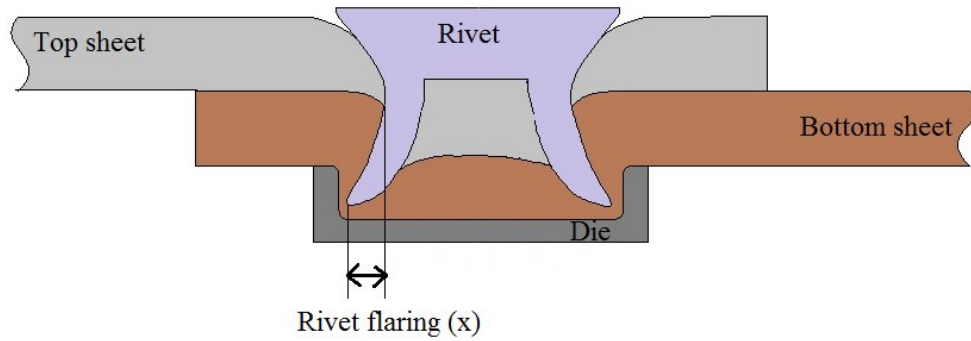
Schematic of a riveted joint showing the amount of rivet flaring
